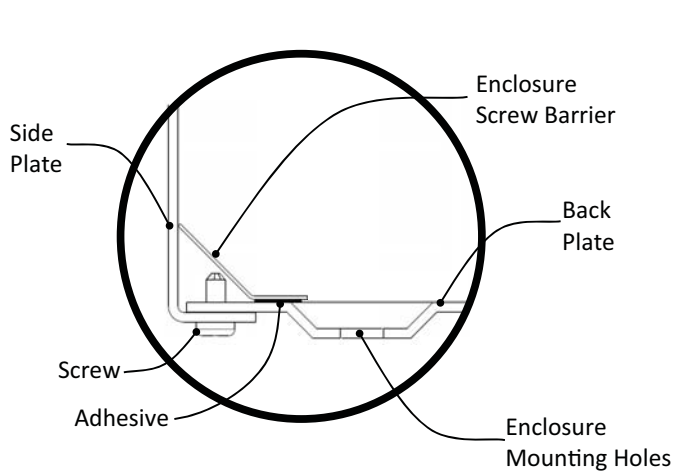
I-Line™ enclosure screws that join the back to the sides, top and bottom plates of five piece I-Line™ enclosure. (Shown with interior removed for clarity. Typical for all figures.)
